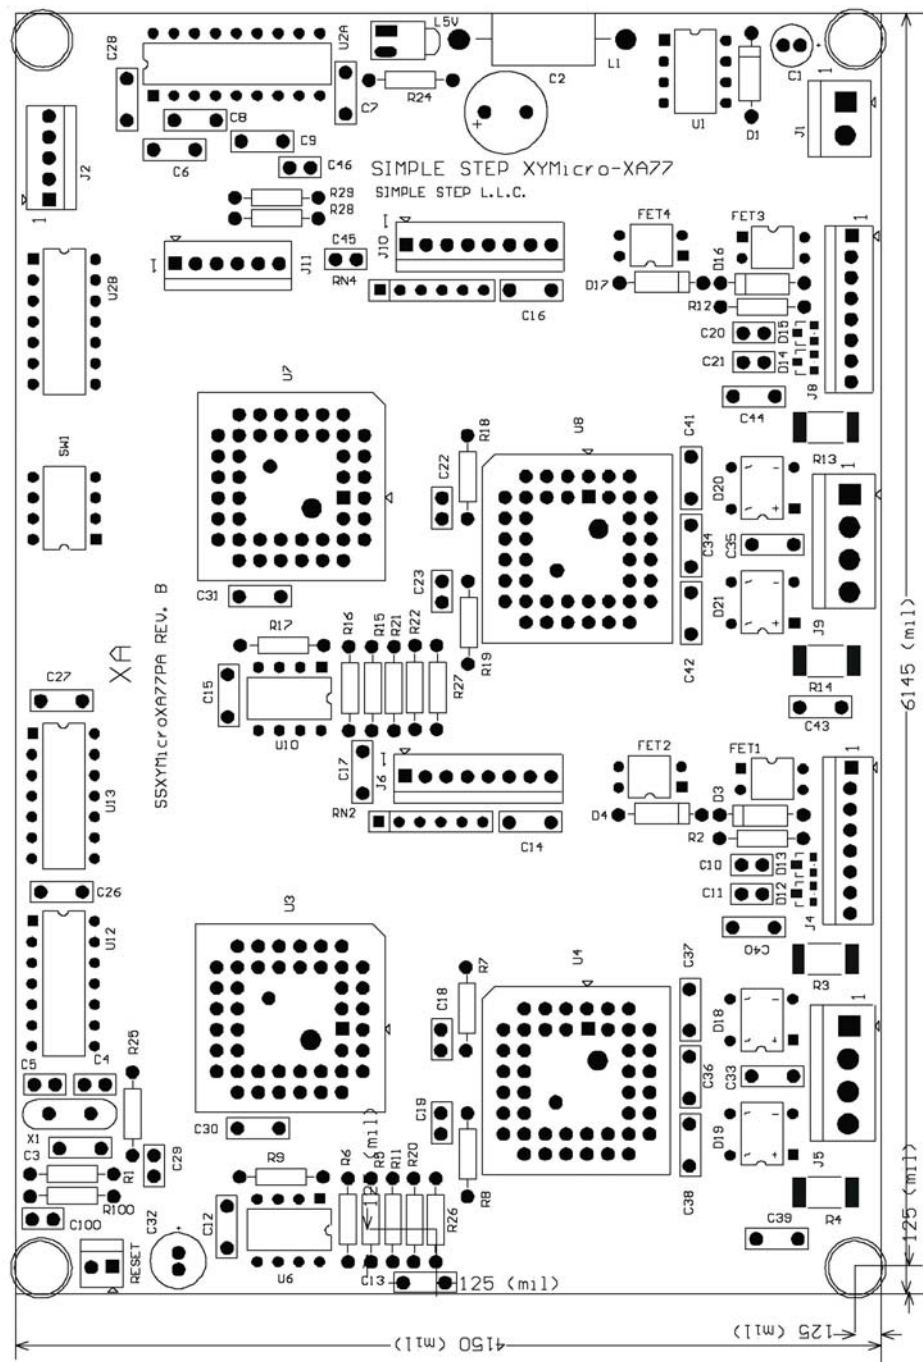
SSXYMicro77 Board Mounting Hole Outline
